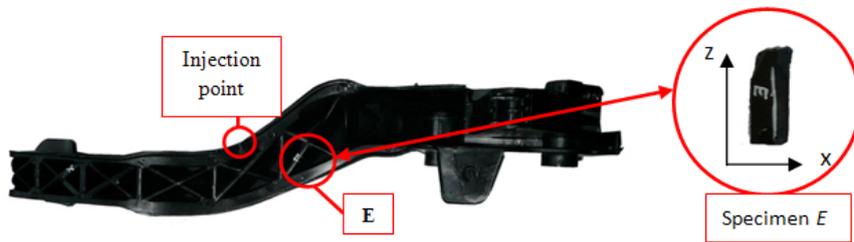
The clutch pedal – BOTTOM VIEW: position of the specimen E and of the injection point
